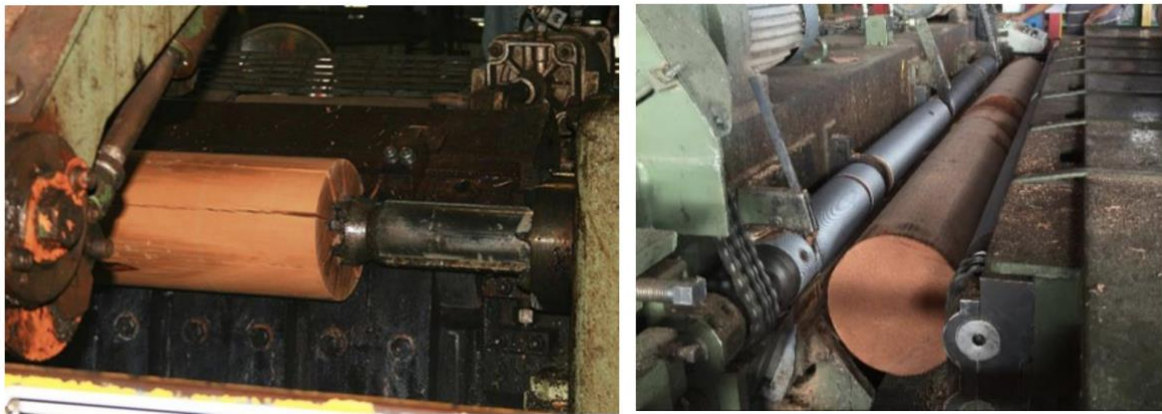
Traditional spindled lathe with a billet end split (left) and spindle-less lathe (right). Source: McGavin, 2016
